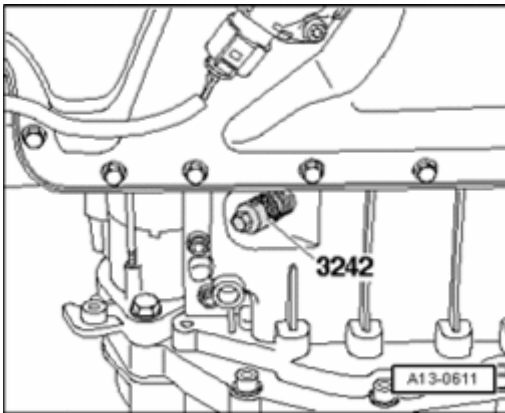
Removing/Installing Crankshaft Holder 3242 Into Hole
